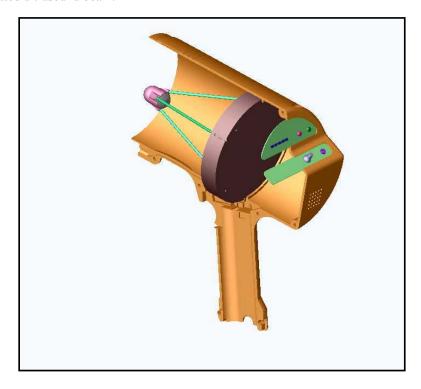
Drawing of the CWD-2002 showing the internal collimating dish, tripod-mounted transducer/aiming light assembly and rear control panels.
